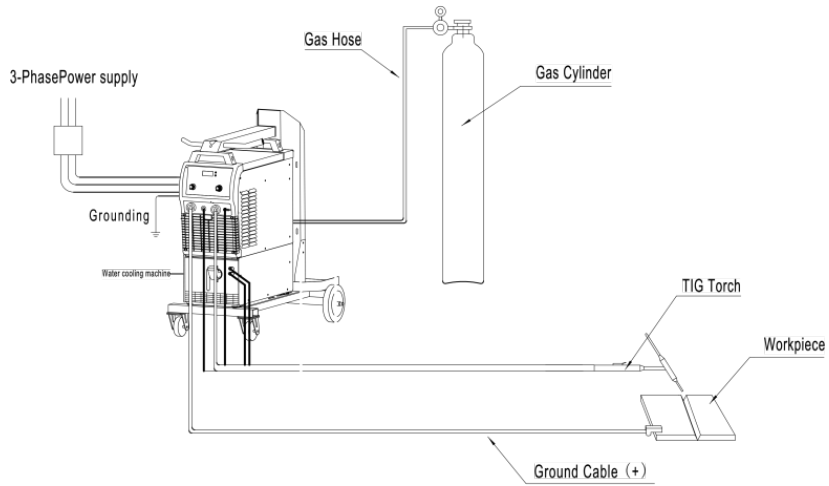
Connection and operation for water-cooling TIG welding(Combined one machine)
